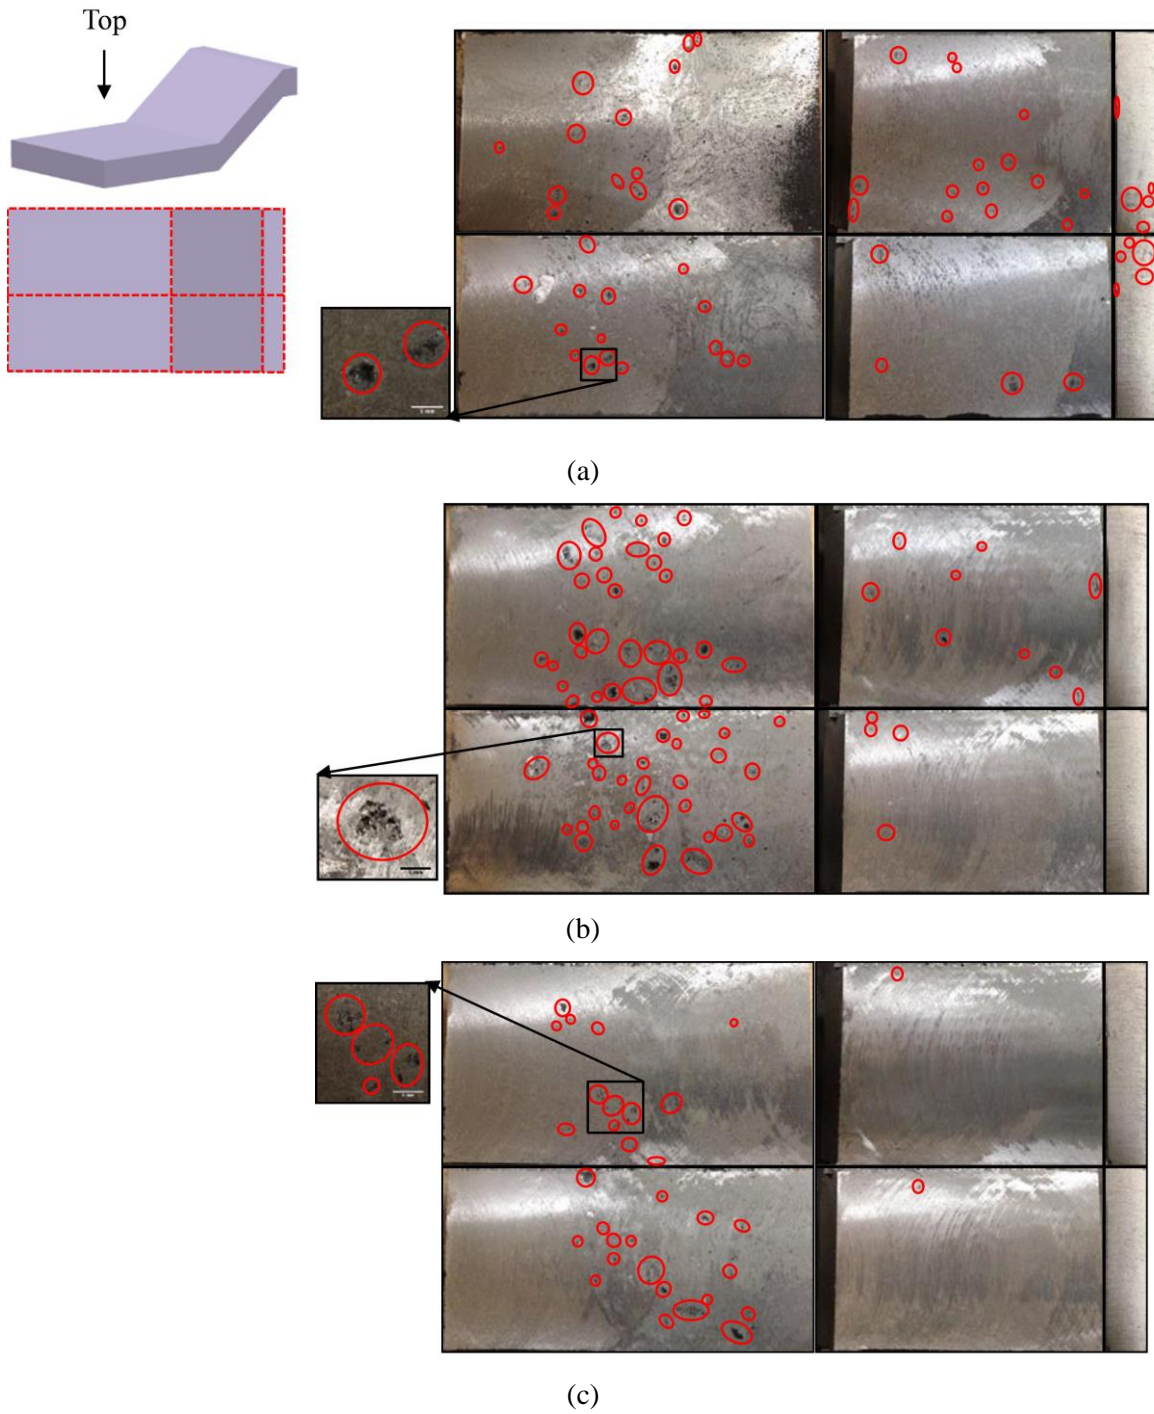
Milling results of casting with inclined surface, casting A. Top surface milled: (a) 1mm (b) 4 mm, and (c) 7 mm.
